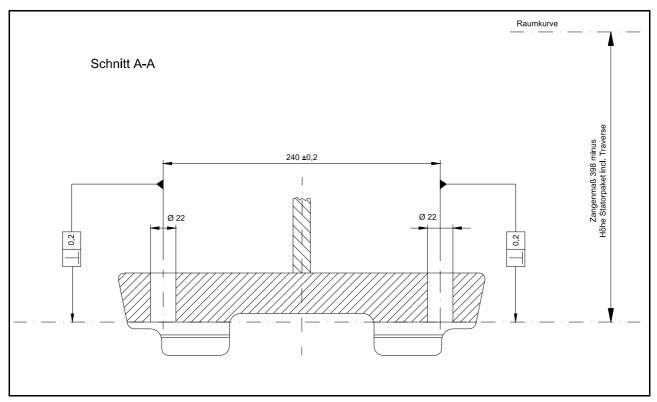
Dimensions and tolerances for designing stator plate incorporation in a steel construction (cross-section)
